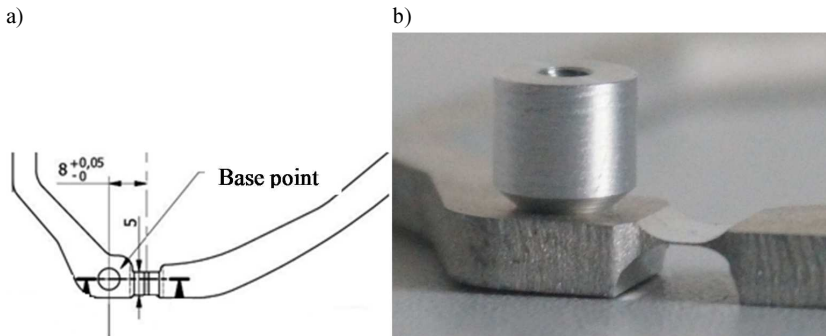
Attaching the reference point to the Zerodur base surface. A fragment of construction drawing of the tested part (a); a view of a cone nut clamping the element to the base screw (b). The place of sticking the screw to the base plate is here invisible.
